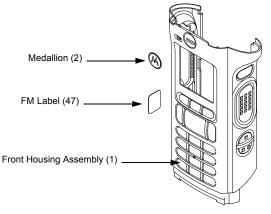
Main Housing Assembly (Dual Display Version, Full Keypad)
